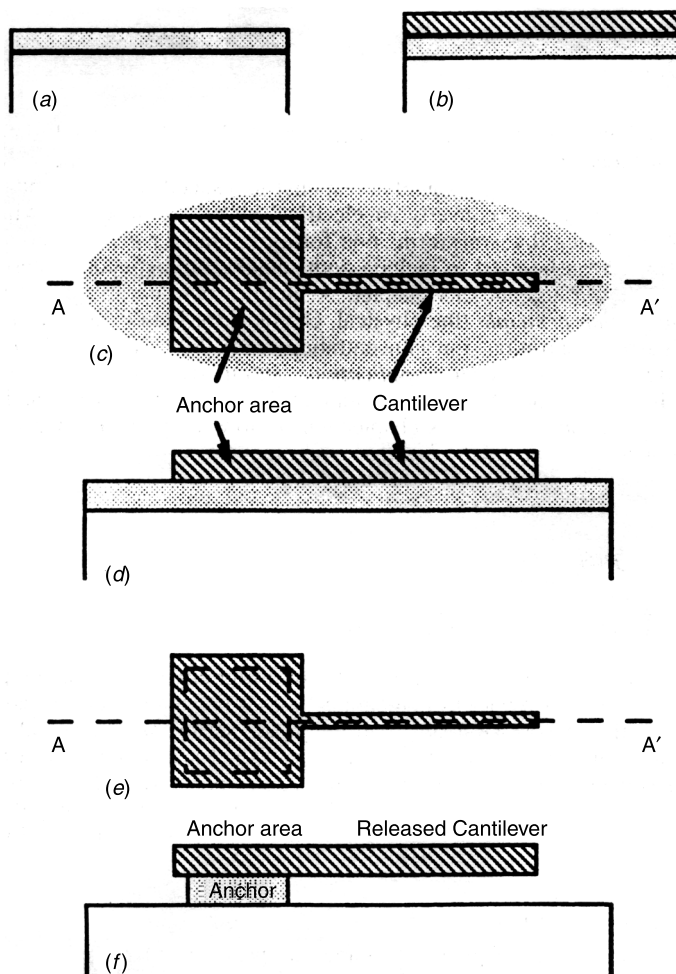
Schematics demonstrating surface micromachining in its simplest form: (a) cross-sectional view after the sacrificial layer is deposited; (b) cross-sectional view after the structural layer is deposited; (c) top plan view after patterning of the structural layer; (d) cross section AA' of (c); (e) top plan view after release; and (f) cross section AA' of (e).
